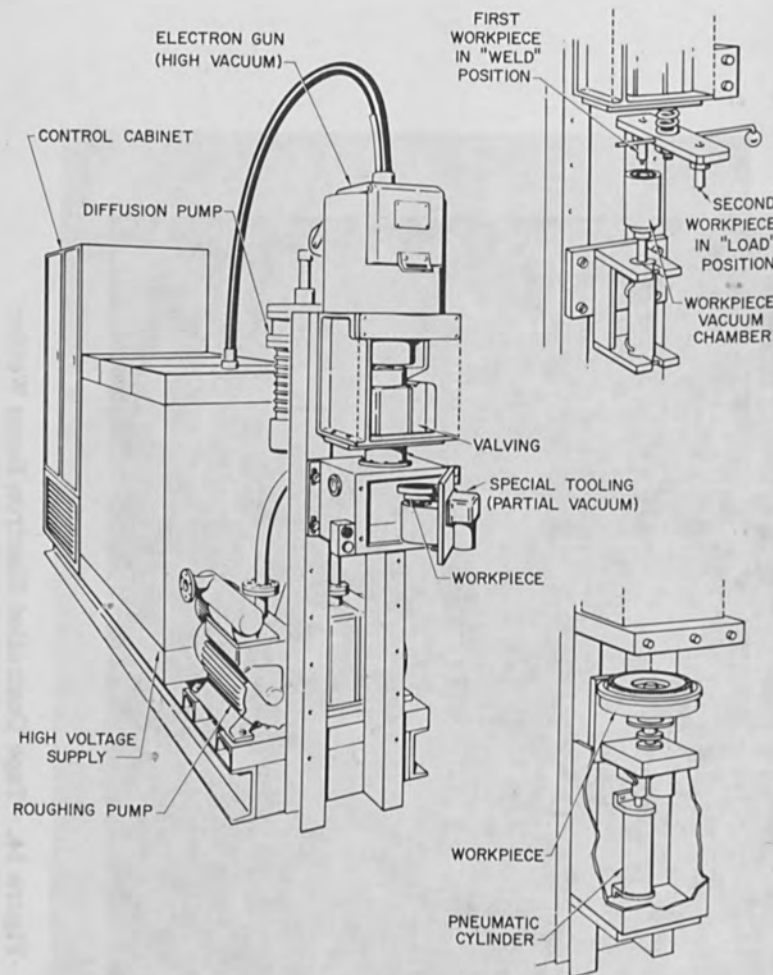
Production Partial Vacuum Electron Beam Welder.
